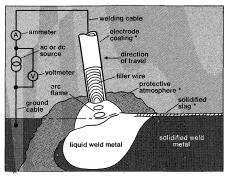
Arc welding with rod electrodes; components marked with an asterisk (*) are not present in some arc-welding processes
